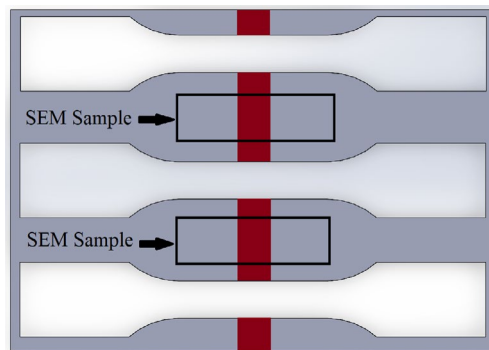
Orientation of 3 tensile specimens along a pair of welded panels.
